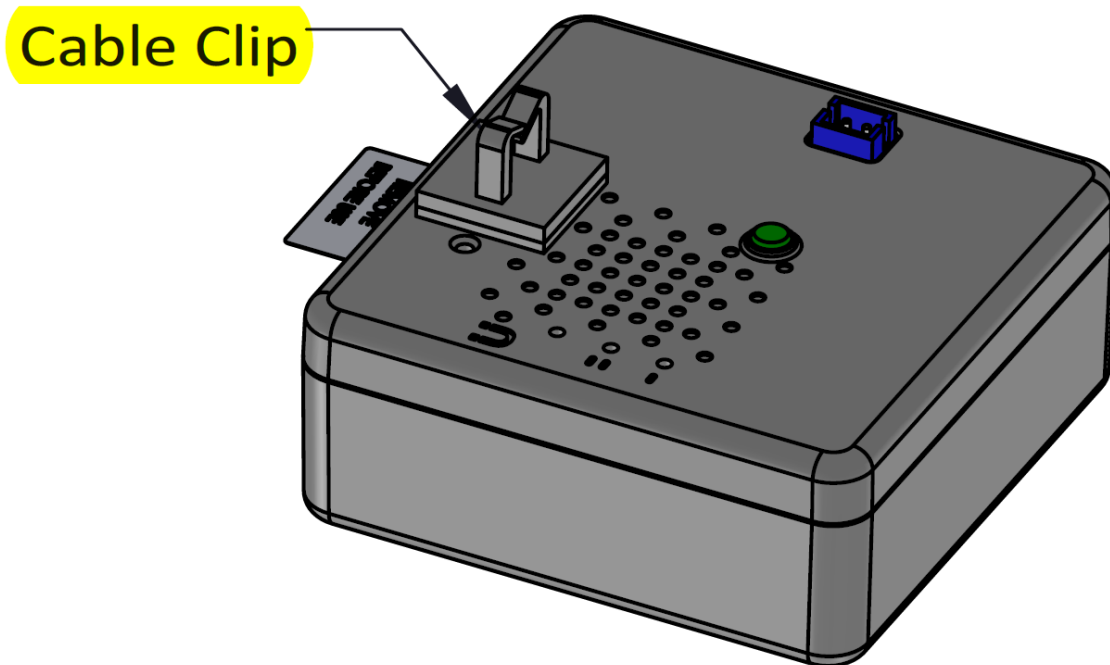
The cable clip to be attached to the Base model as shown, should a cable be connected to the External Connector.
